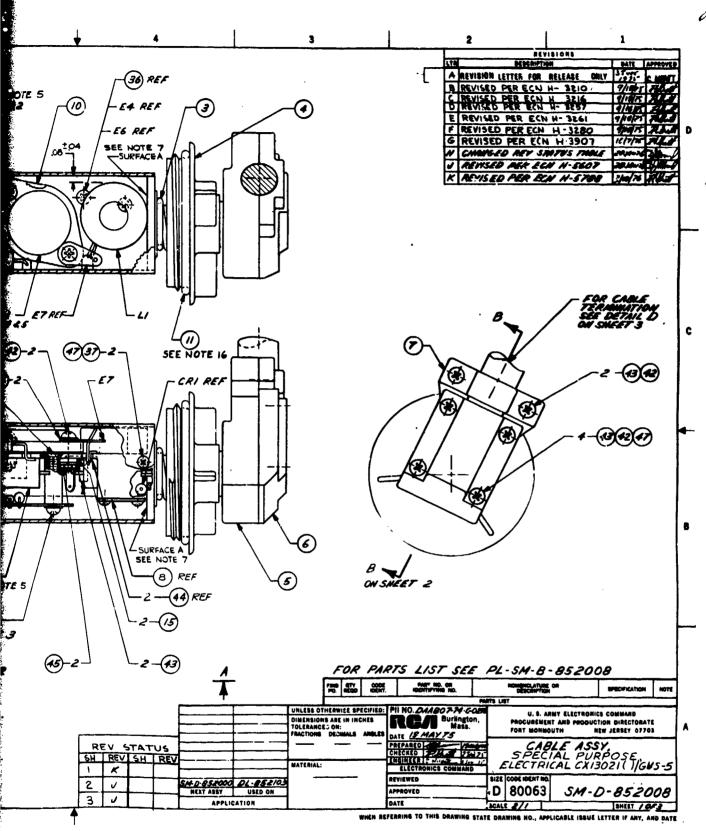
Remote Power Cable Configuration (Sheet 1 of 3)
